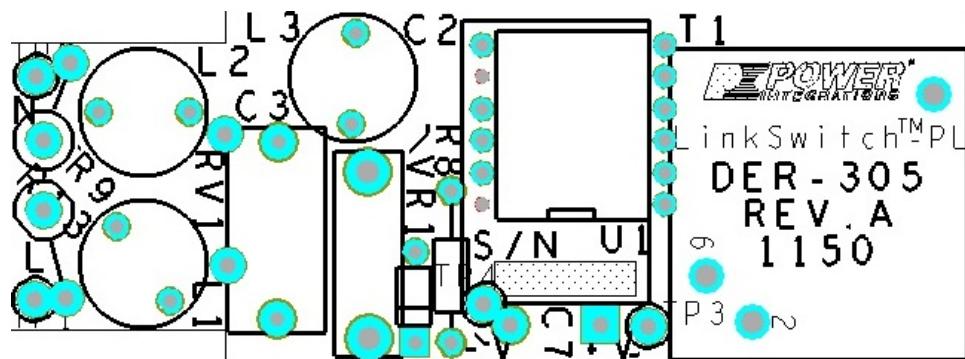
Top Side. Dimension 53.5 mm x 19.6 mm
